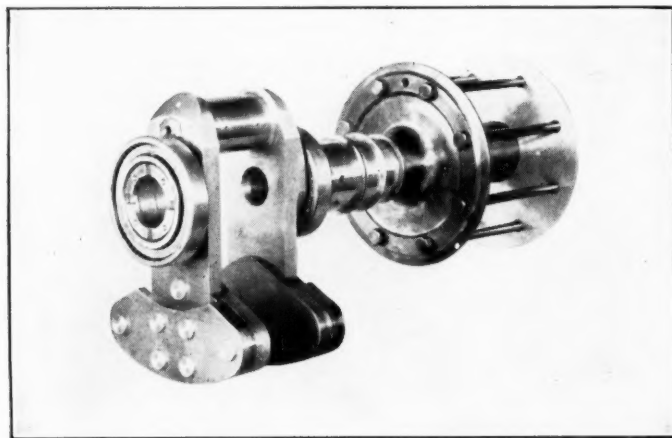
Crankshaft of the Pratt & Whitney engine equipped with S. K. F. anti-friction bearings.
